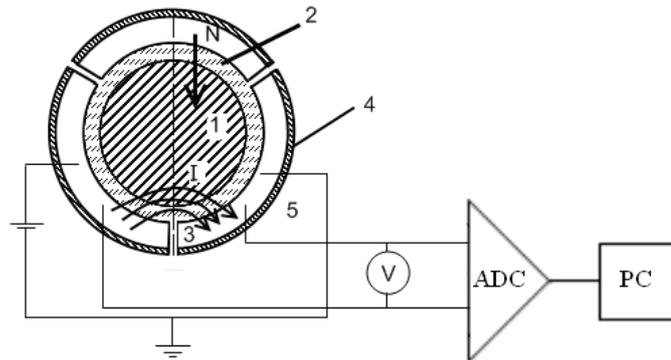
The electrophysical sounding circuit of the sliding bearing (1 – shaft, 2 – grease, 3 – insert, 4 – insert insulation, 5 – bearings body).
